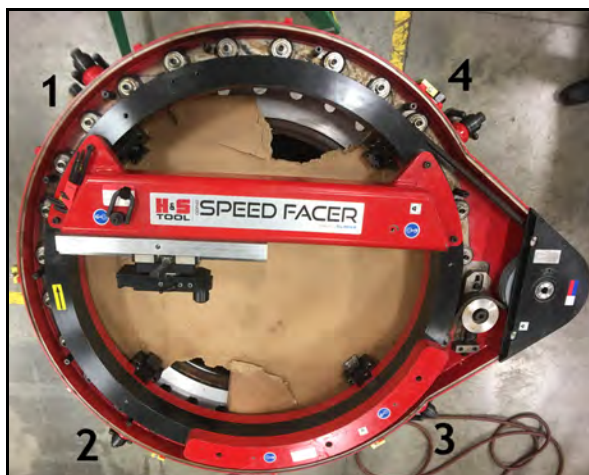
INITIAL ROLLER BEARING LOCATIONS
